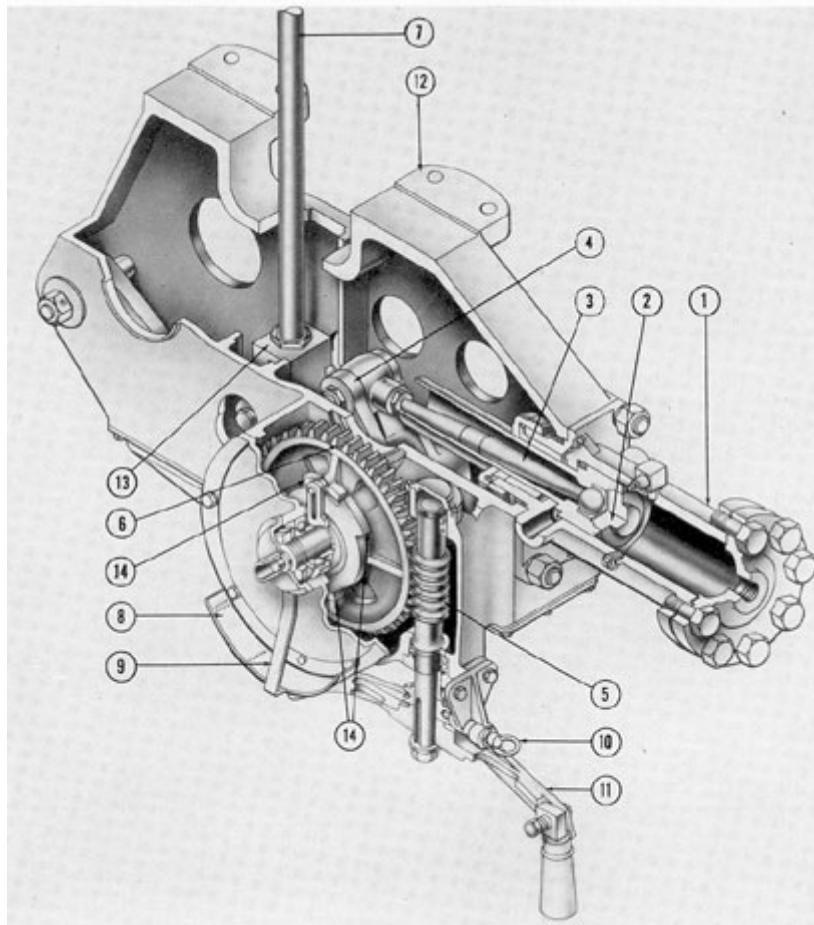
Cutaway of main engine drowned-type exhaust valve operating gear and hydraulic cylinder.
